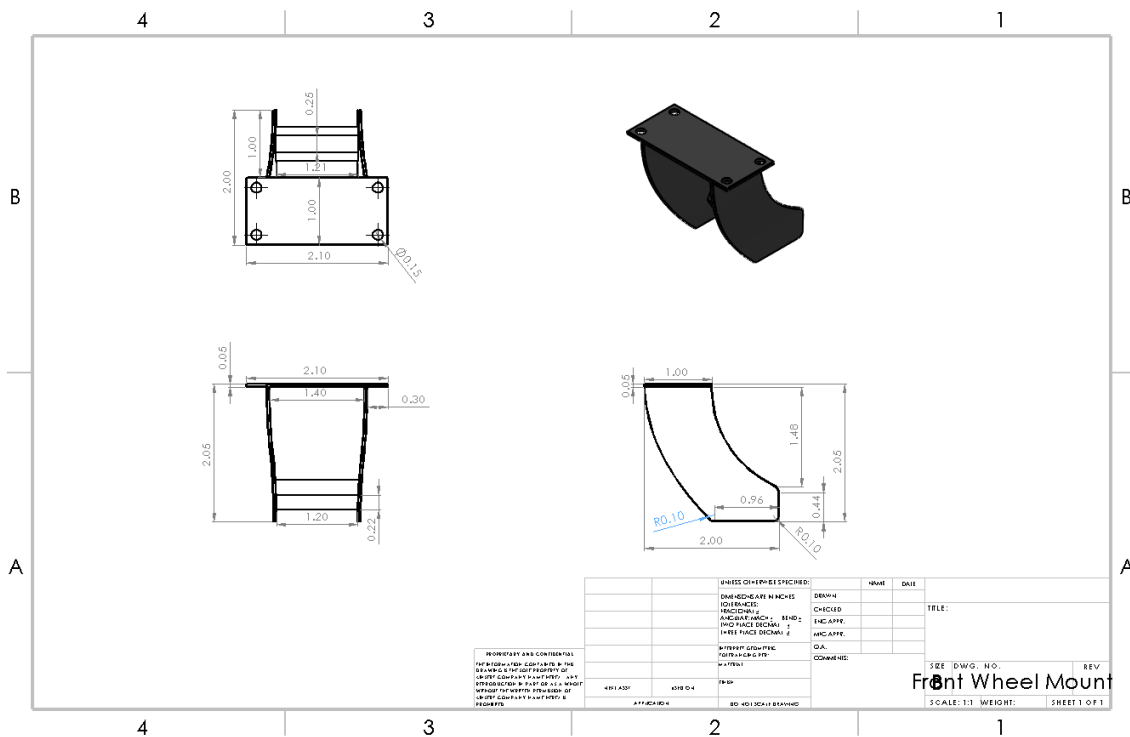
The sketch and dimensions of the front-wheel mount.
